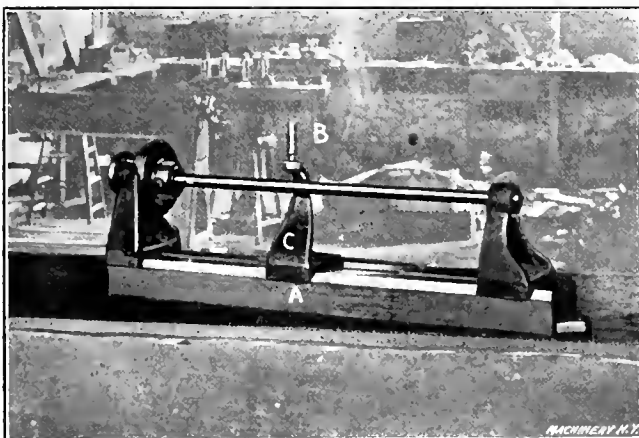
Inspector's Fixture for Testing Cam-shaft Keyways
